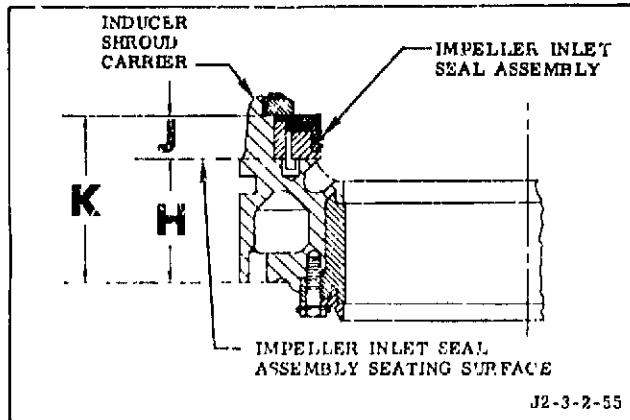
Dimensional Requirements for Installing Impeller Inlet Seal Assembly
